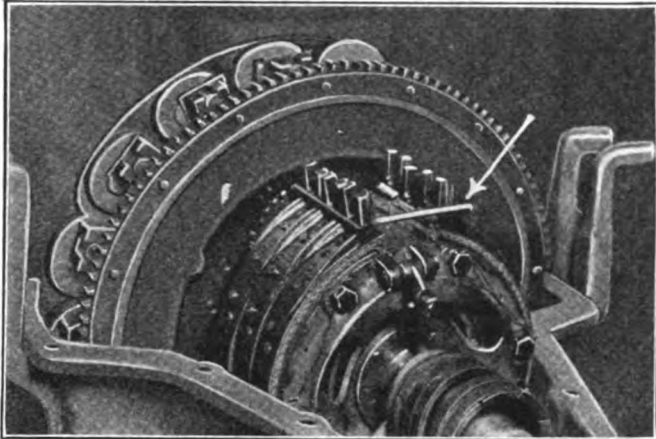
HOLDING FORD TRANSMISSION BANDS WHILE INSERTING BOLTS
